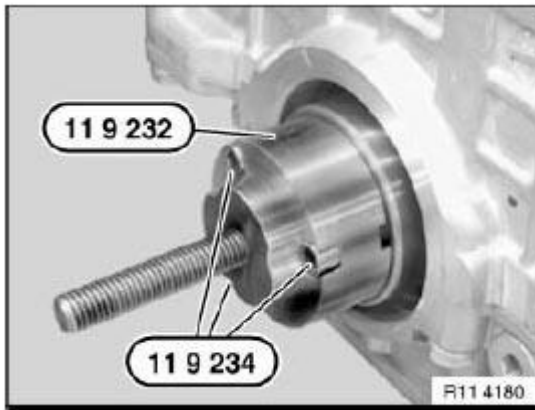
Screwing Special Tool (11 9 232) With Screws (Special Tool (11 9 234)) To Crankshaft
